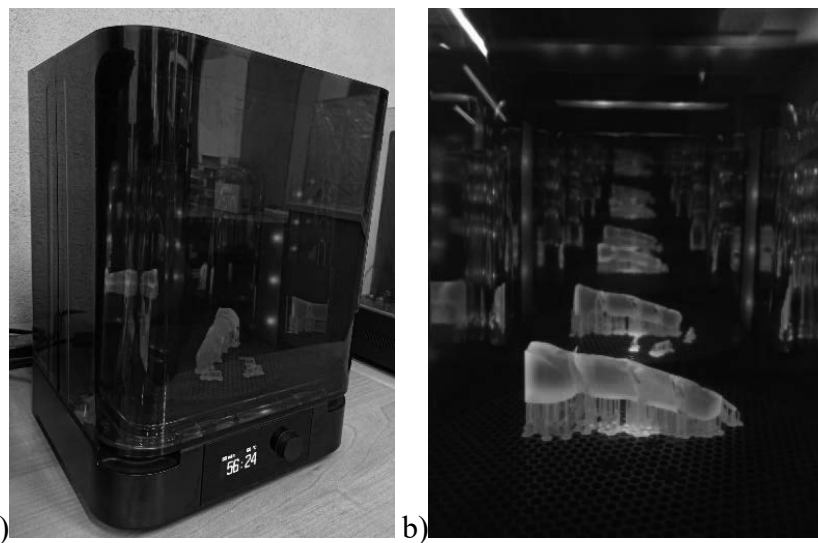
FormLabs Cure device: a) external view of the device; b) internal view of the device.
